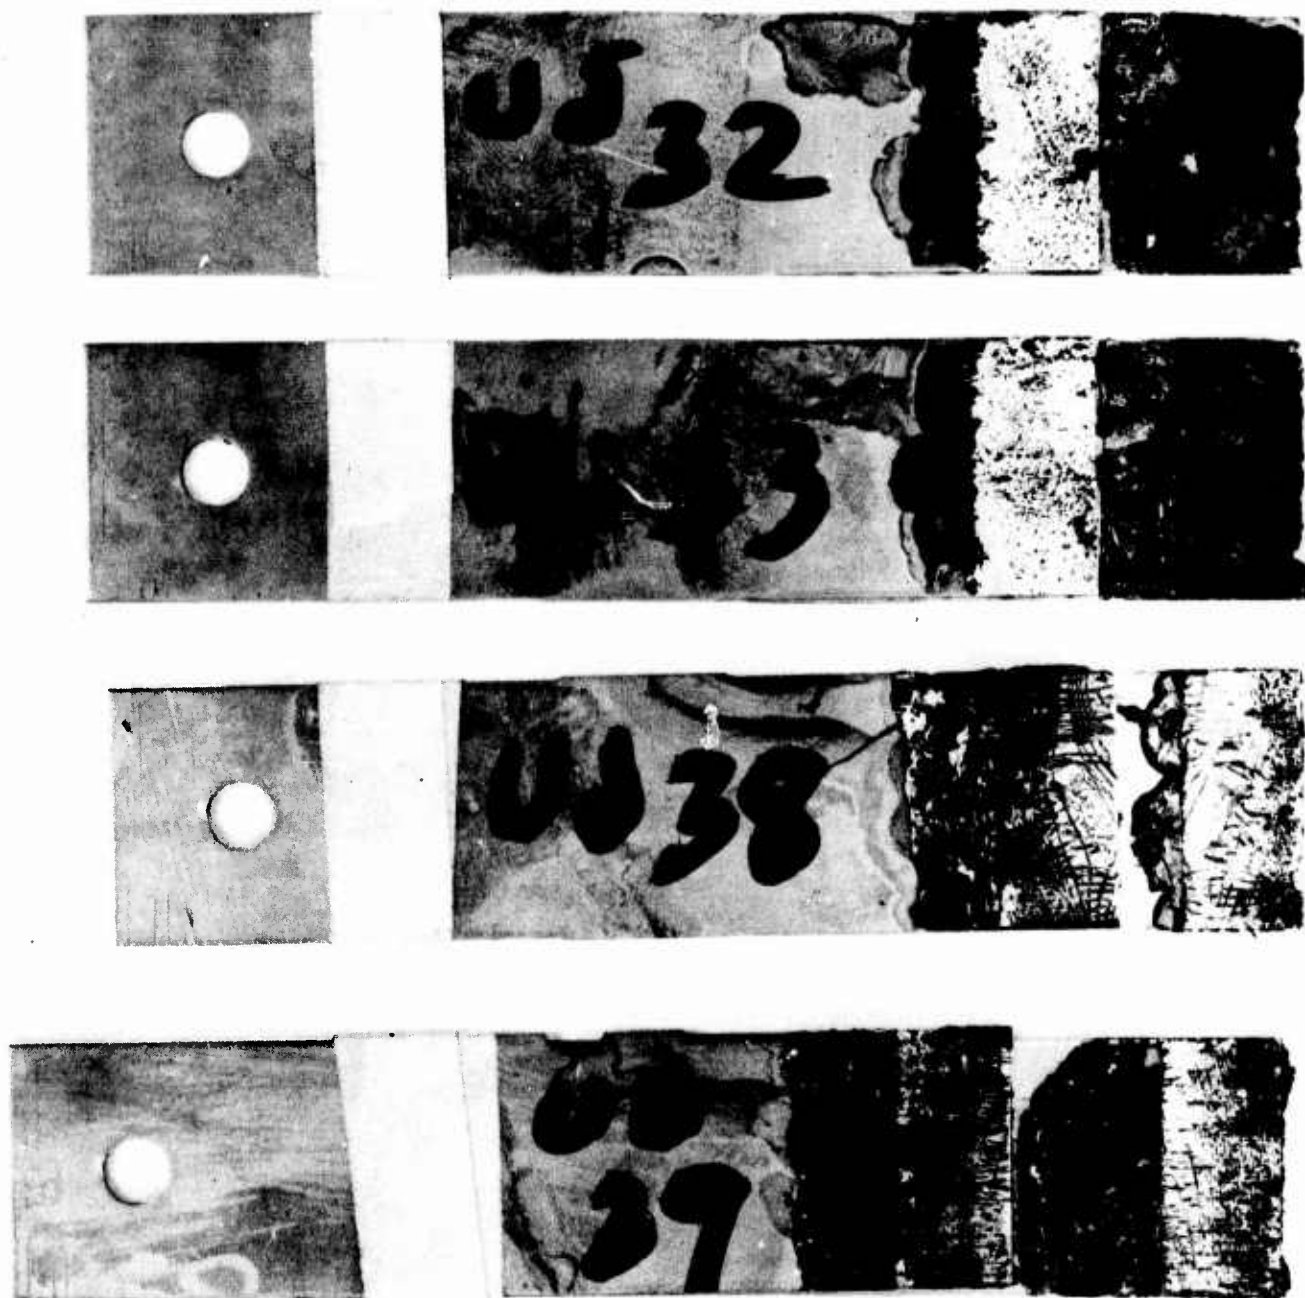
Tested UpJohn 2080 Lap Shear Specimens
